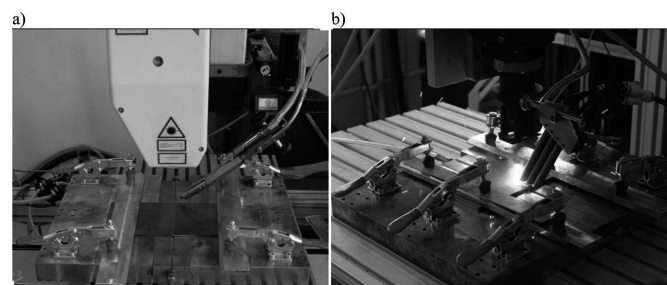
Experimental setup for autogenous laser welding of butt joints equipped with : a) HPDDL ROFIN DL 020, and b) Disk laser TRUMPF TruDisk 3302
